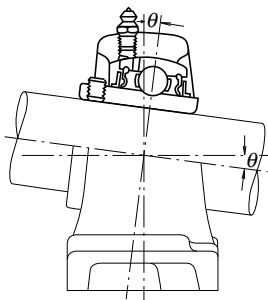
Permissible Misalignment of Ball Bearing Units
